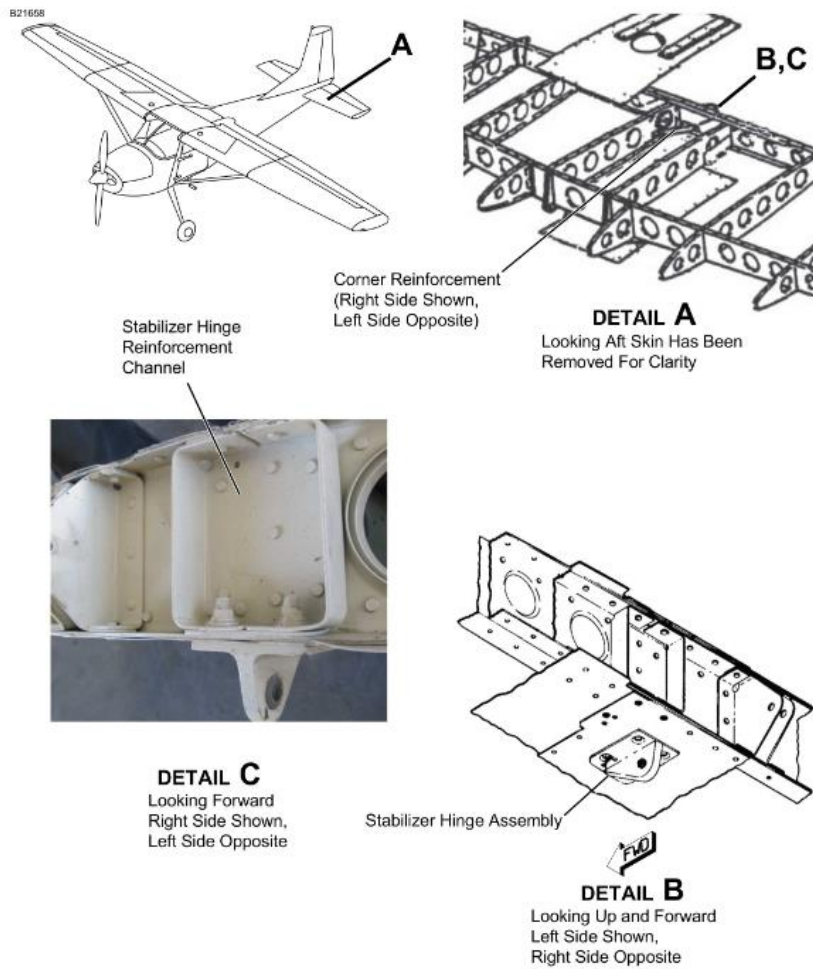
Horizontal Stabilizer Inspection (Sheet 1)
